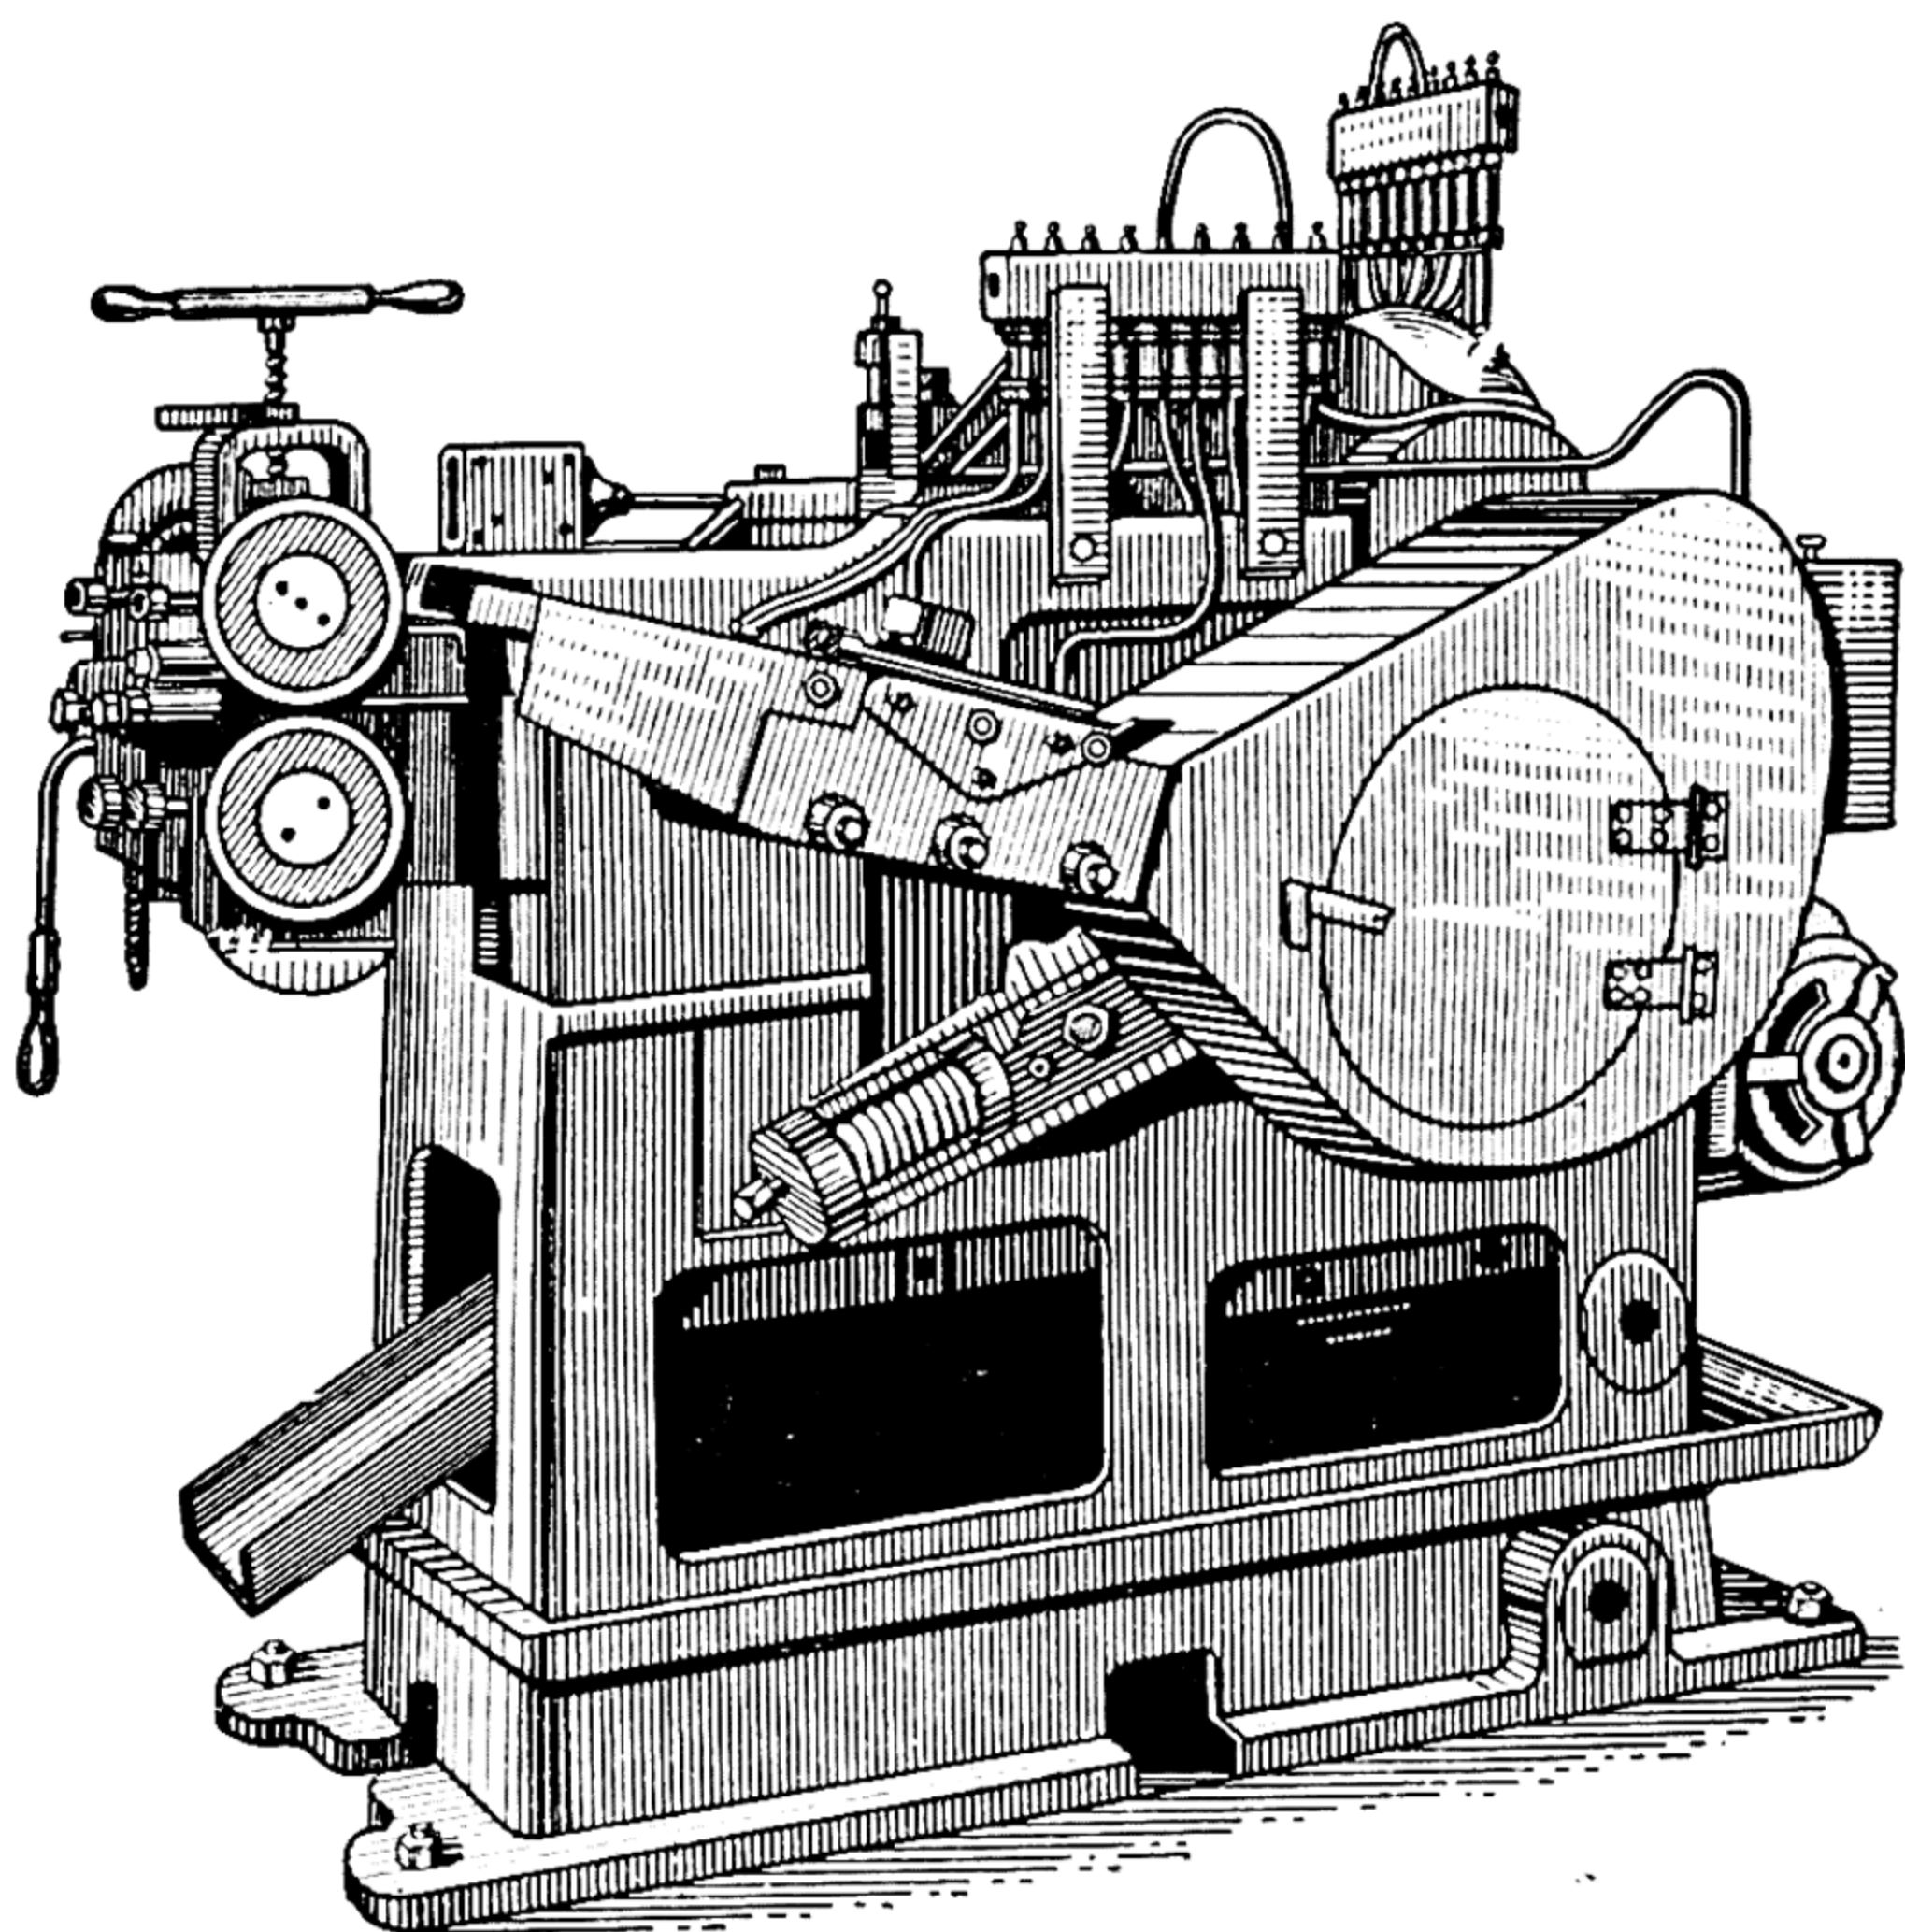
The AA120 6×50mm double-stroke solid die automatic cold header
